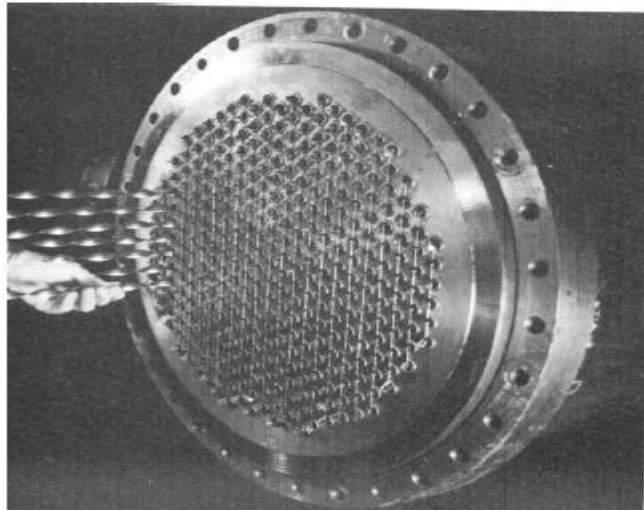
Shell-and-tube heat exchanges with twisted-tape inserts
